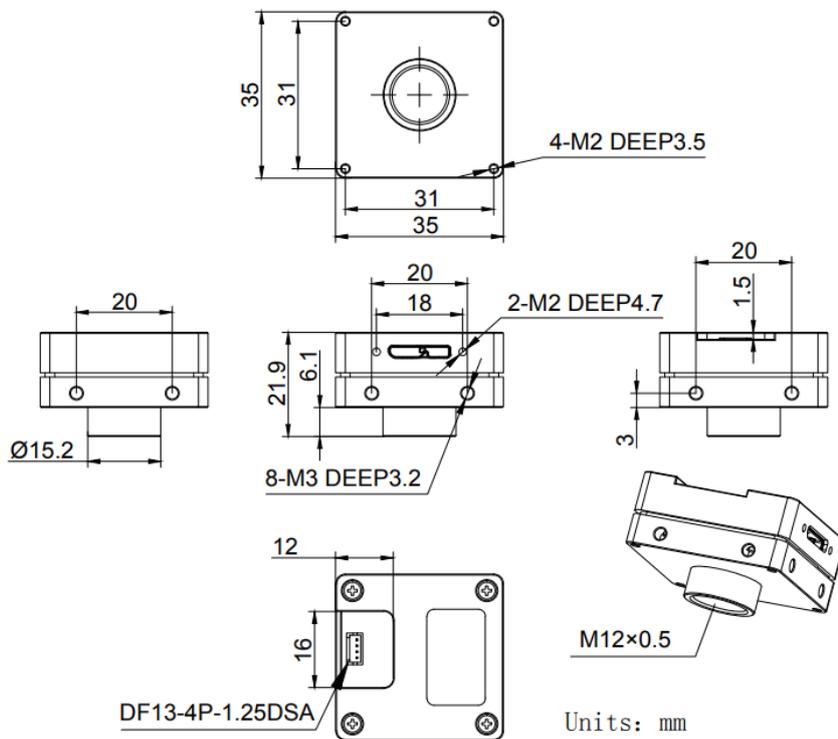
All-in-one USB3.0 camera mechanical dimensions (S-Mount)
